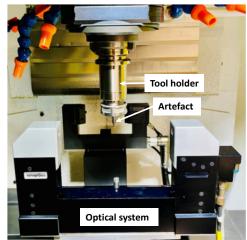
The camera-based optical system. The reference artefact is mounted in the spindle of the machine tool.
